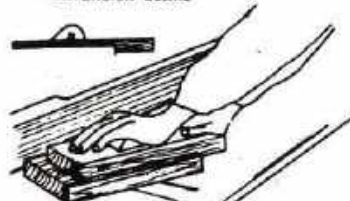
PLANING SHORT STOCK WITH A PUSH SHOE
